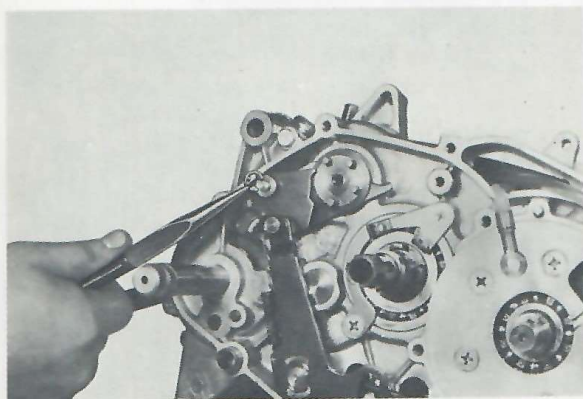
Removing gear shifting cam guide and stopper set circlip
